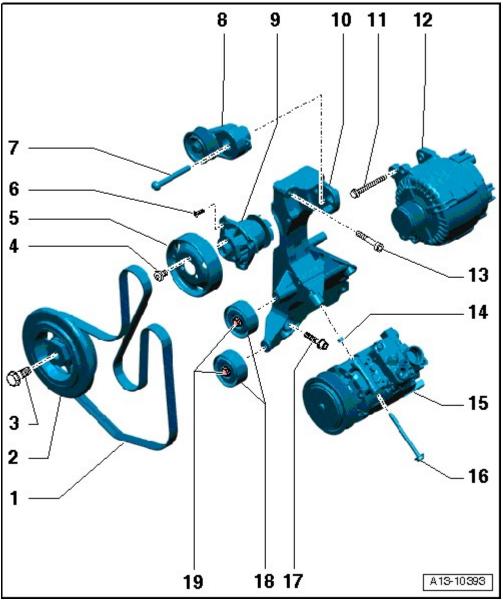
Ribbed Belt Drive, Component Overview Courtesy of AUDI OF AMERICA, LLC
